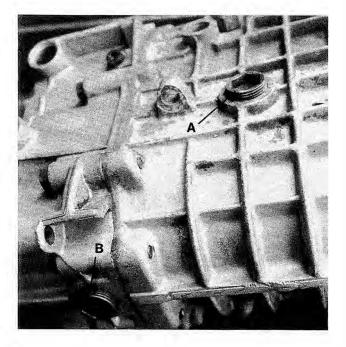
Remove oil filler plug (A) to check transmission lubricant level. Remove oil drain plug (B) to replace lubricant. Use 17 mm hex wrench to remove plugs.
